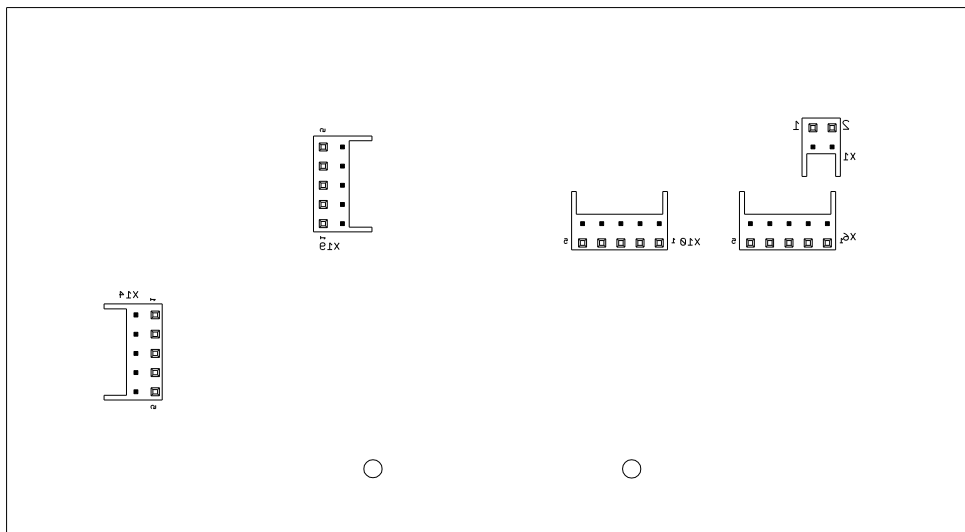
Components placed on the bottom side of the F3L020E07-F-P_EVAL
